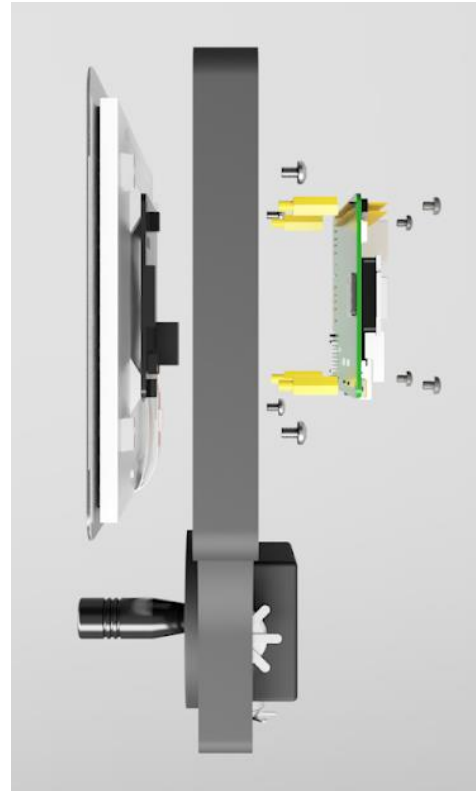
Exploded render view of HMI panel, showing how the touch screen and Pi connect to the housing.
